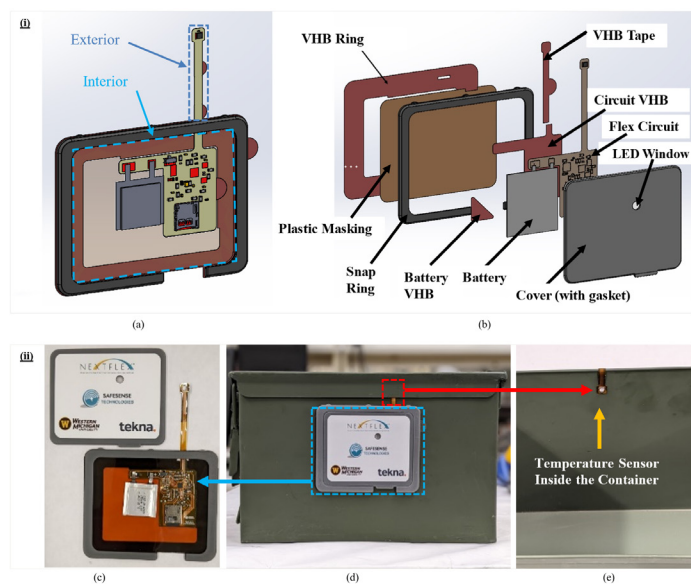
Snap-in enclosure: (i) illustration: (a) schematic, and (b) exploded view; (ii) fabricated prototype: (c) fabricated CFS with designed enclosure, (d) installation of enclosure on the container, and (e) installation the sensor inside the container.
